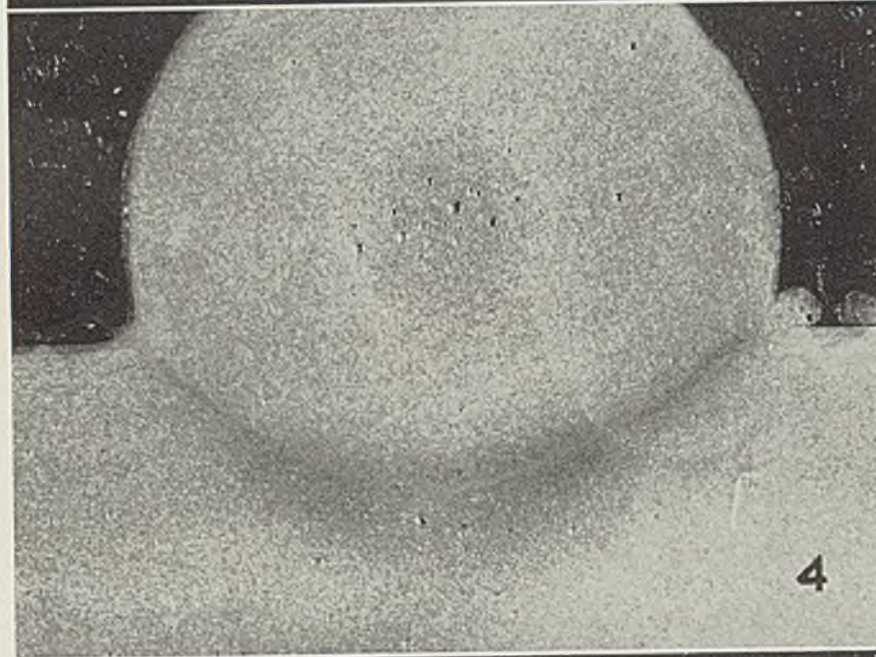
Section through cross-wire weld in the  $\frac{1}{4}$ -inch round material
